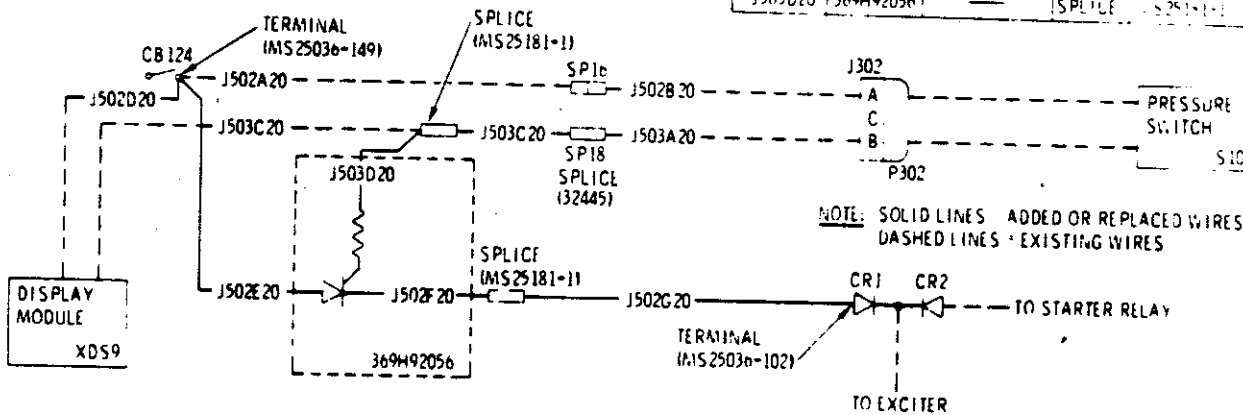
Installation of SCR Assembly - Auto-Reignition Modification Kit PN M50036
